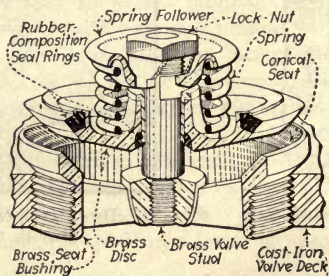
Conical-Seated Pump-Valve With Brass Disc.
